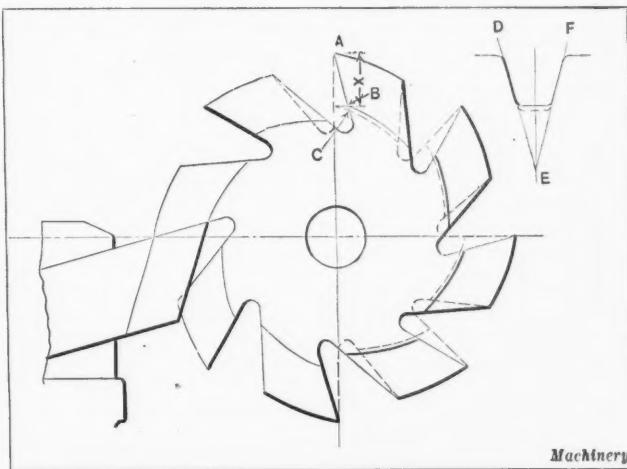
Manner of tilting Cutter when relieving Under-cut or Hooked Teeth of Hobs and Formed Milling Cutters
